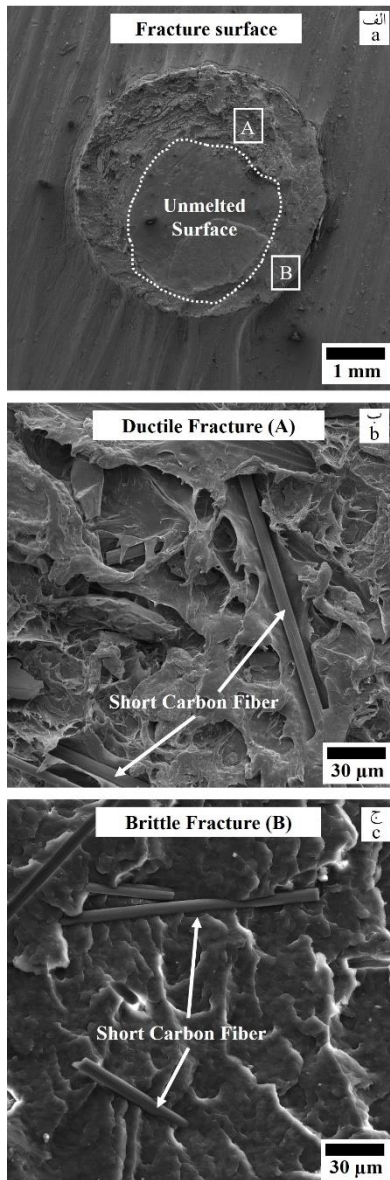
SEM images of fracture surface at 500 rpm: a) Two different areas on the fracture surface, b) ductile fracture surface (A area) and c) brittle fracture surface (B area)
